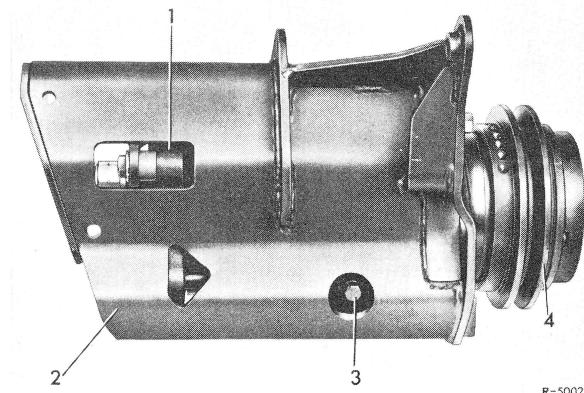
Refrigerant compressor with electro-magnetic clutch and mounting bracket
